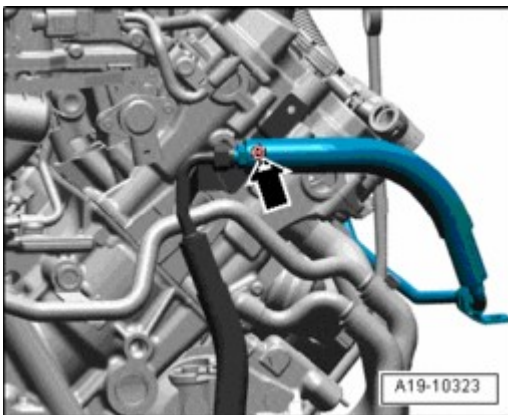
Removing Front Power Steering Pressure Line Bracket From Cylinder Head
